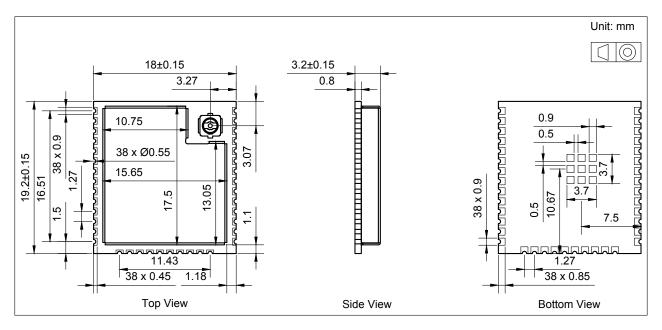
ESP32-WROOM-32UE Physical Dimensions
